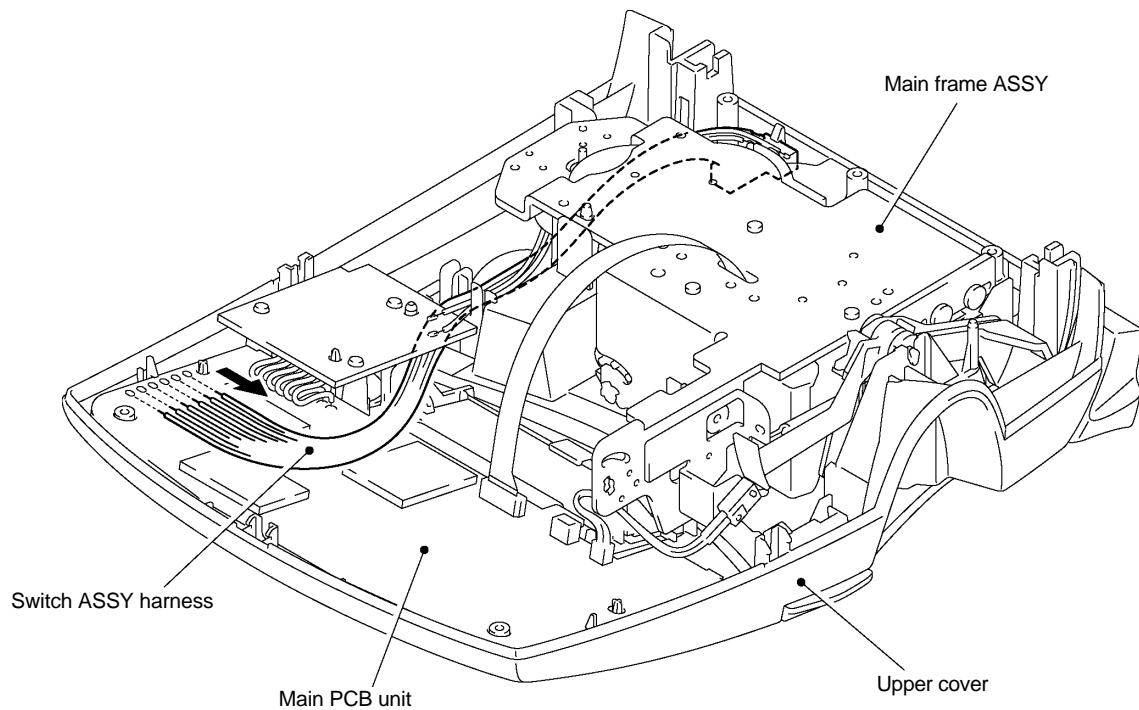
Removing the Main Frame ASSY (1)
